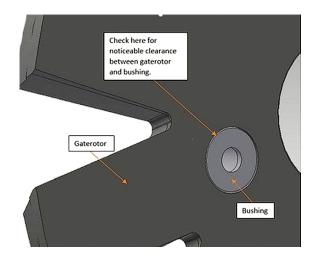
Visual Inspection Between Gaterotor and Bushing
